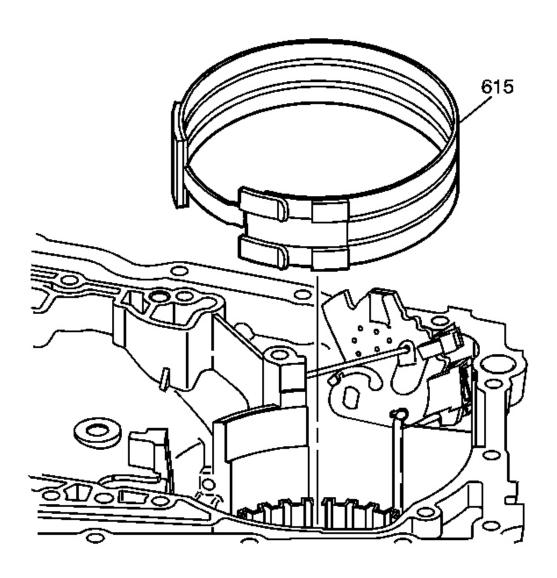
View Of Reverse Band Assembly Courtesy of GENERAL MOTORS CORP.
